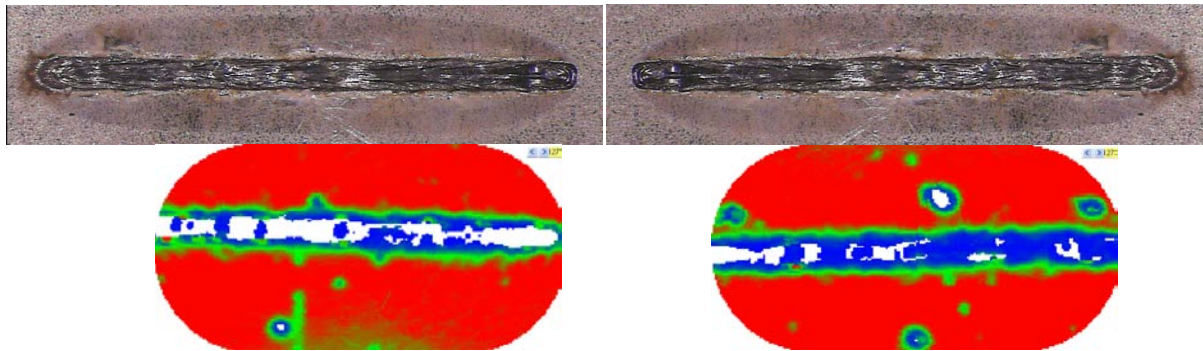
Weld top bead (nubbed, sample C) and Amstech result from top bead (L) and bottom bead (R)
